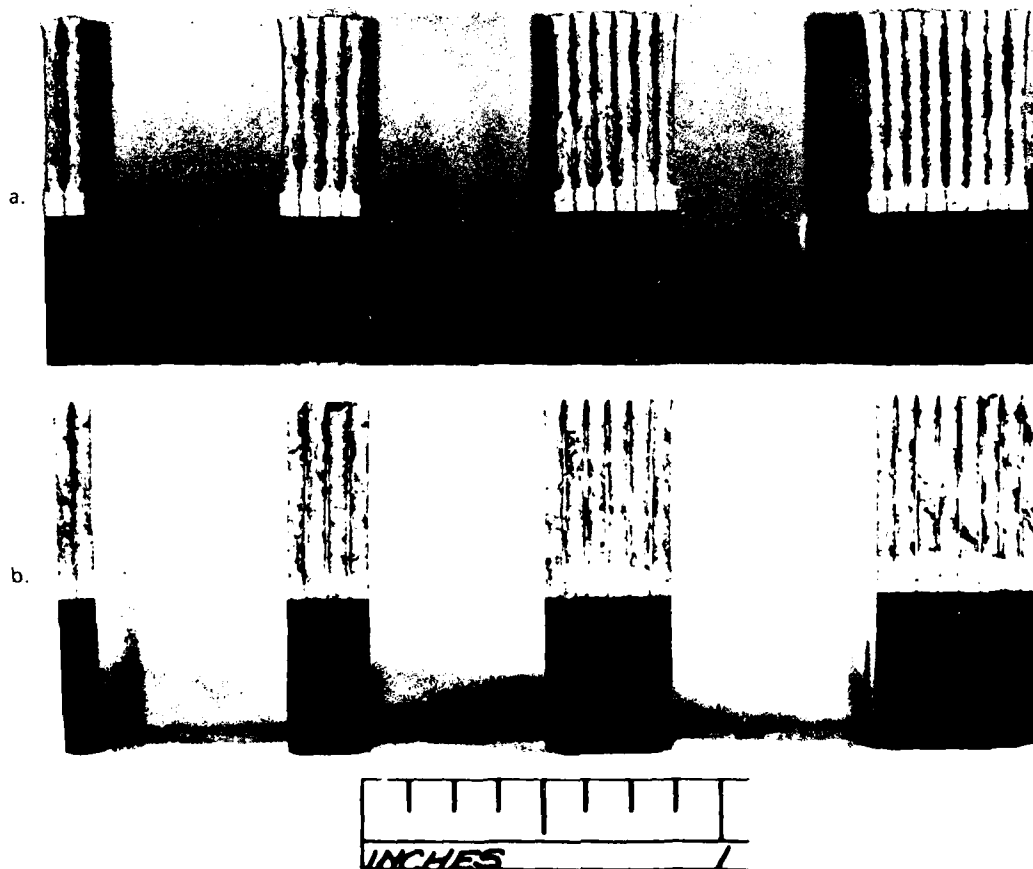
Fracture surfaces from laminated (a) aluminum 7049-T73 and (b) titanium 6Al-4V.
